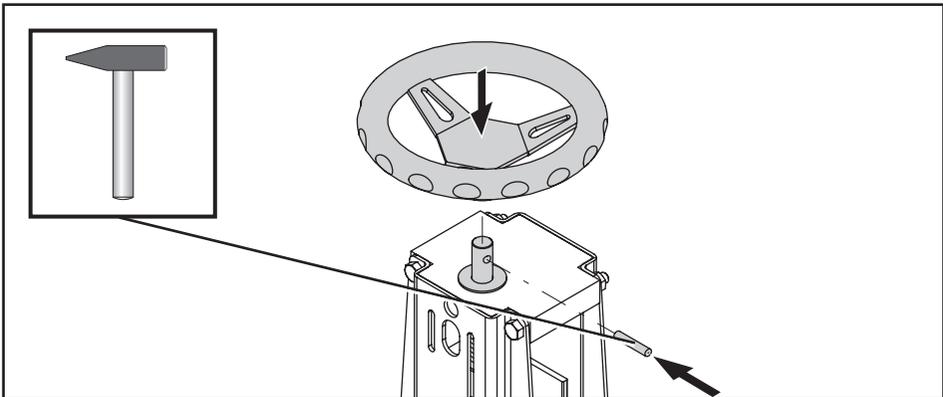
Knife-gate-valve, mounting a hand wheel
